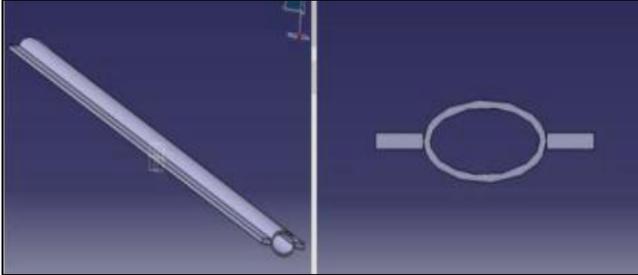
3D and Cross-sectional views of Radiator Tube
